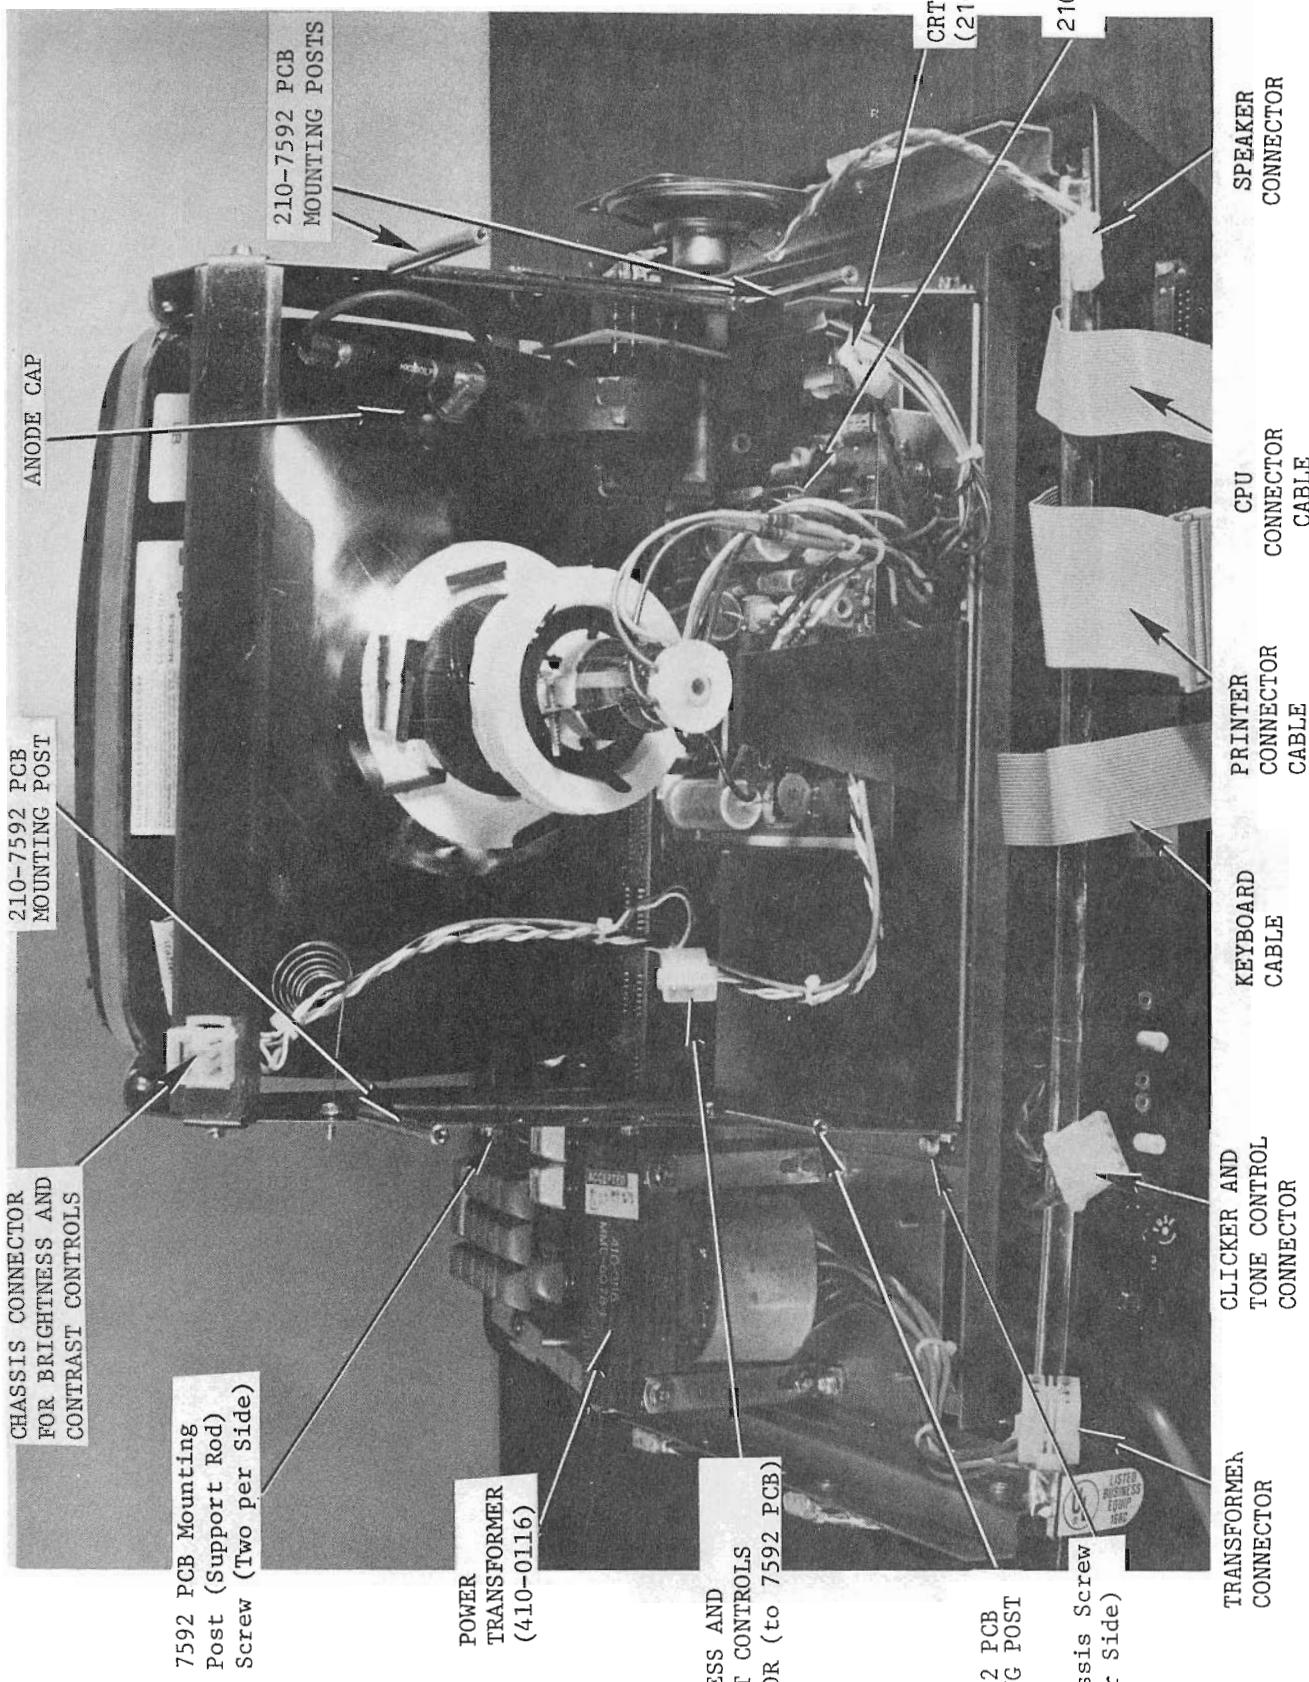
Rearview of Chassis with 7592 PCB Removed
